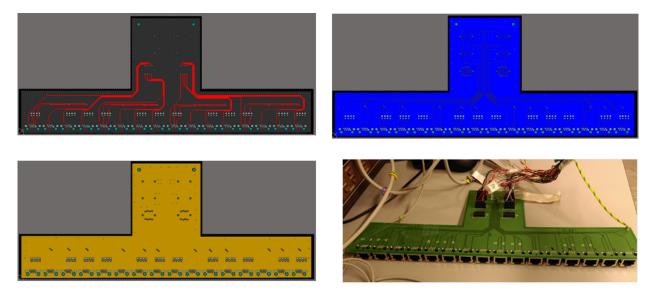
RJ45 breakout board for multi-module testing showing the PCB layout and the assembled PCB. Top left - Top Layer, Top right - Bottom layer, Bottom left - Inner ground plane and Bottom right - Assembled PCB.
